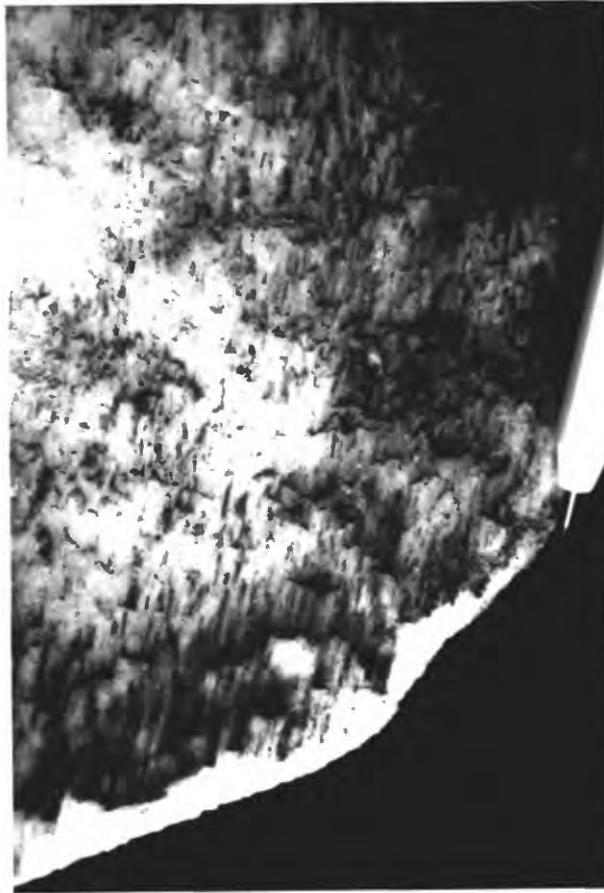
Fracture plane of a volute piece, showing stepped surface with accumulated dirt; piece from volute 17A.
